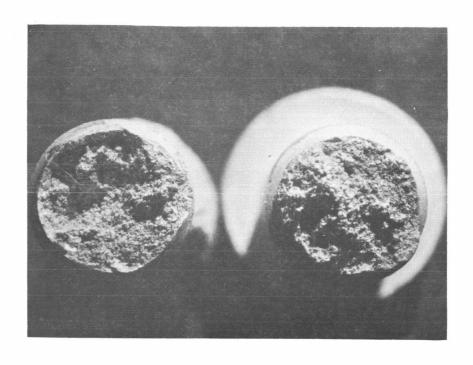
FRACTURE SURFACES, SPECIMEN 3, 8X
